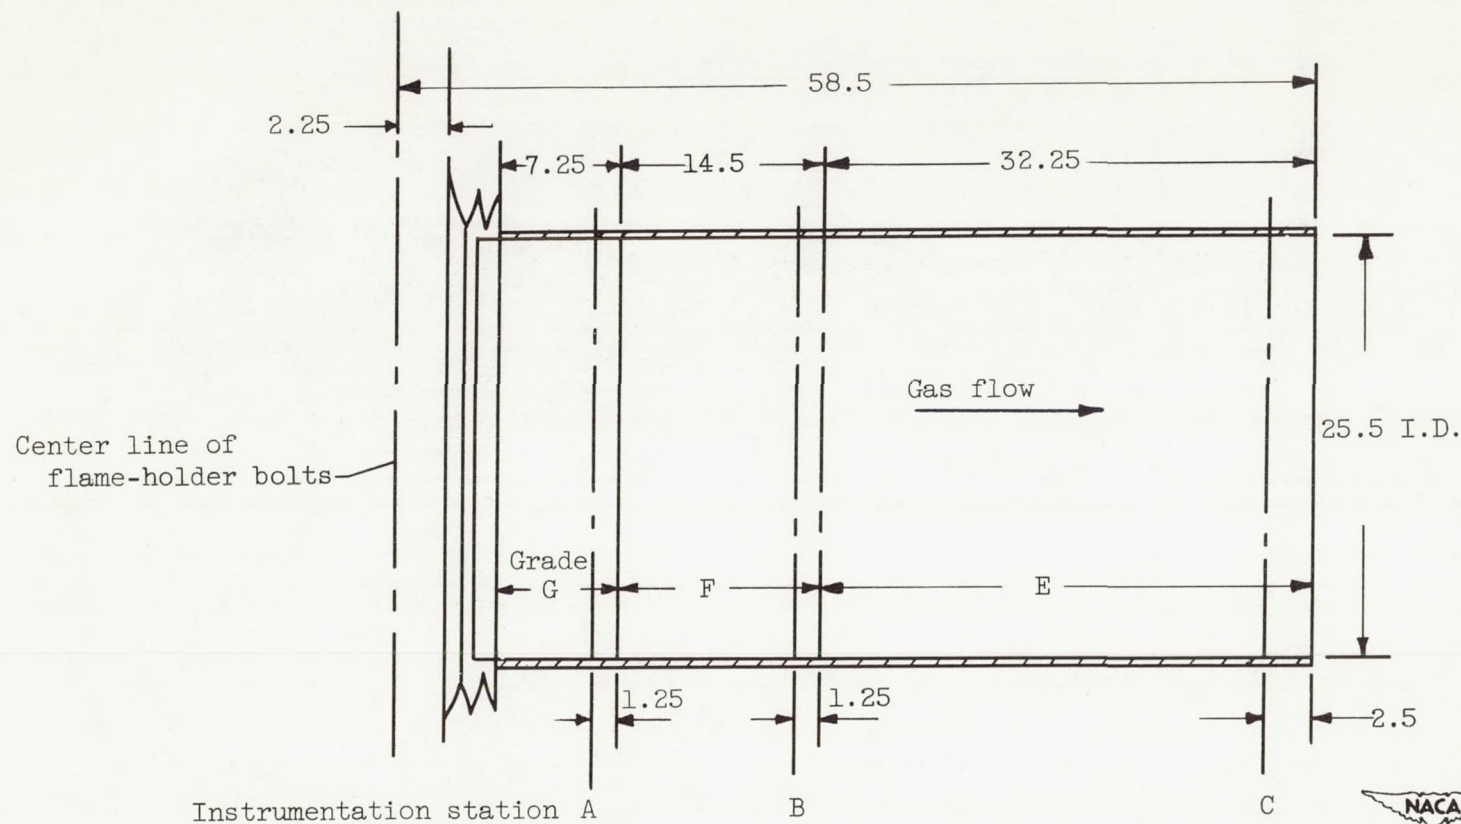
Sketch of welded combustion-chamber wall of 1/4-inch-thick porous stainless steel showing instrumentation stations. (All dimensions in inches.)
